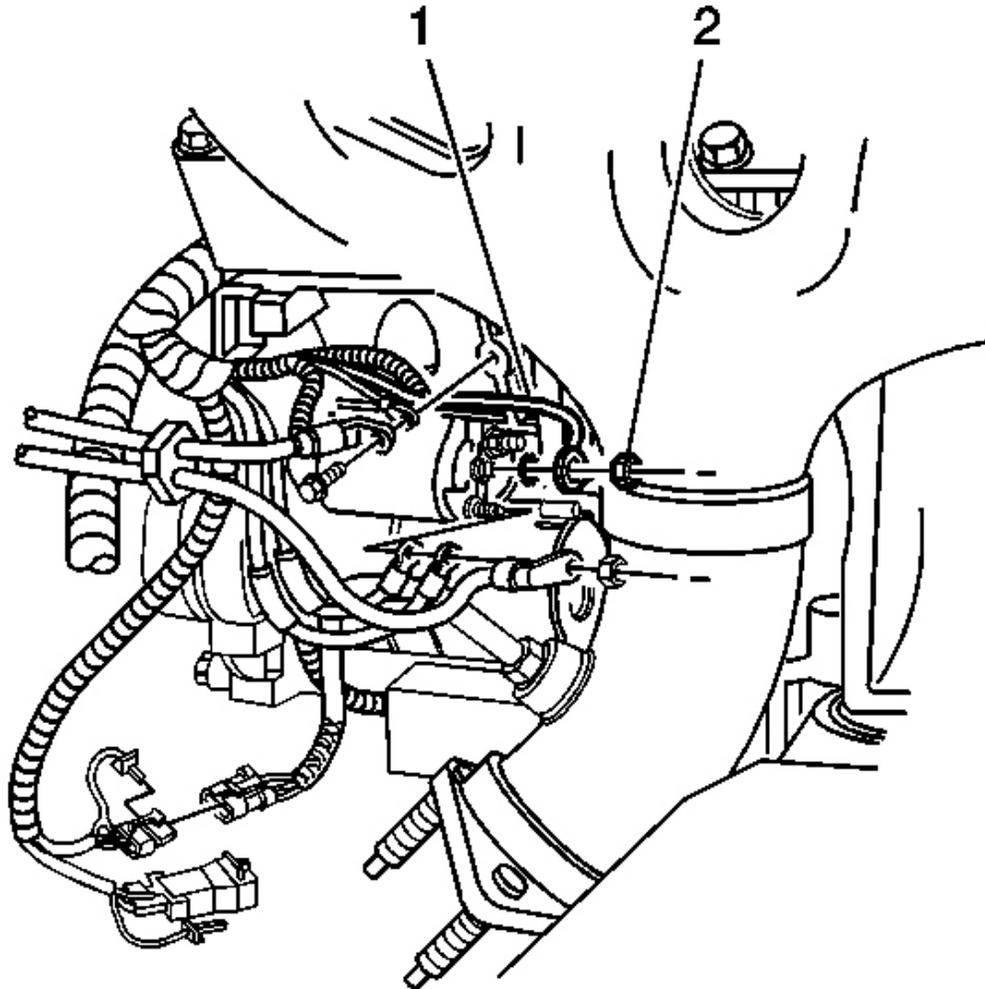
Solenoid Engine Harness Leads & Positive Battery Cable Terminal
